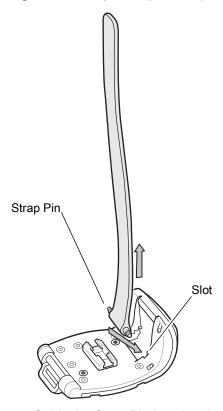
Strap Pin Removal (Trigger Swivel Assembly)
